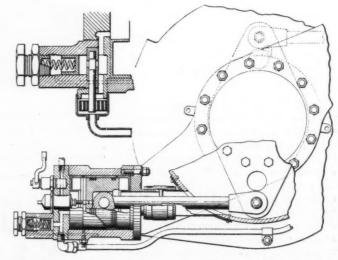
Frequency of harmonic vibrations changed by adjustable damper. Insert is thermostat valve
